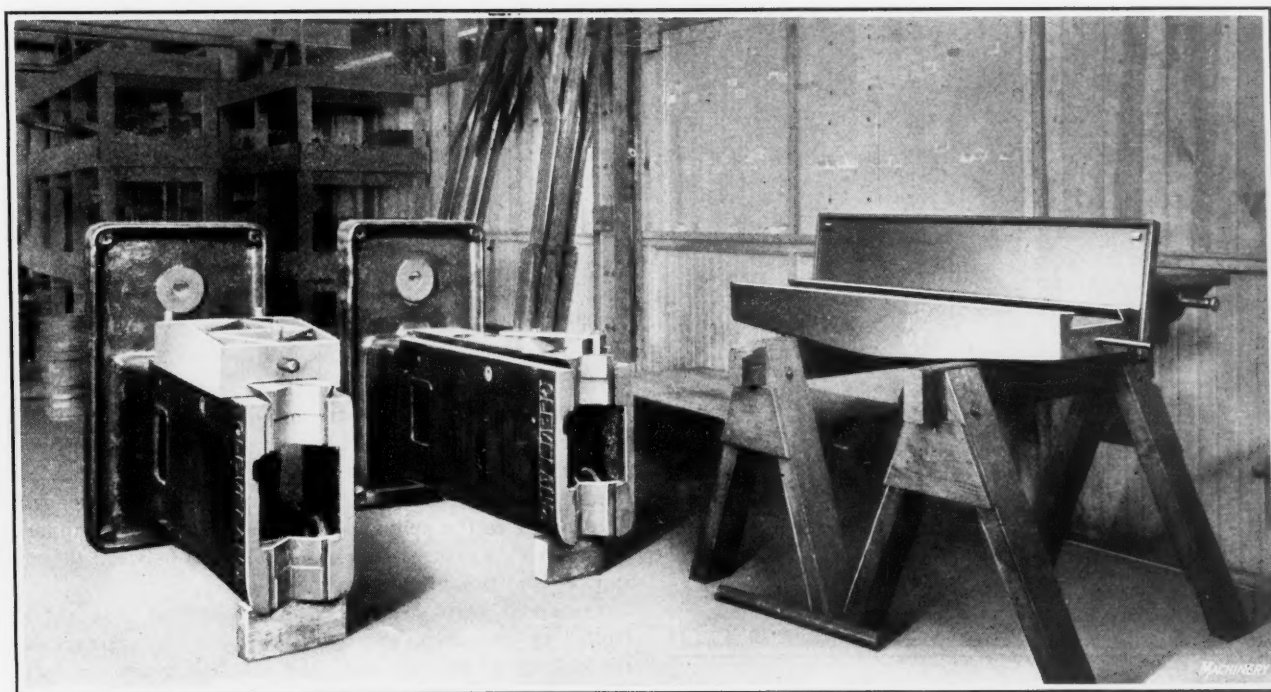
Milling Machine Columns blocked up in Readiness for Scraping
